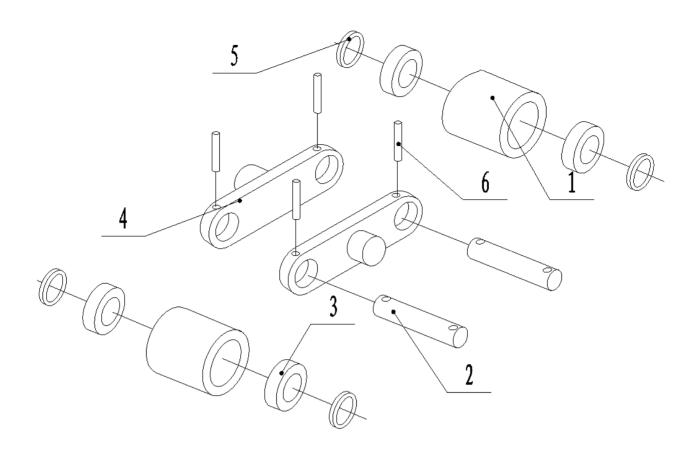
Spare parts list for Front wheel assembly/ Lista ricambi per complessivo rulli anteriori
